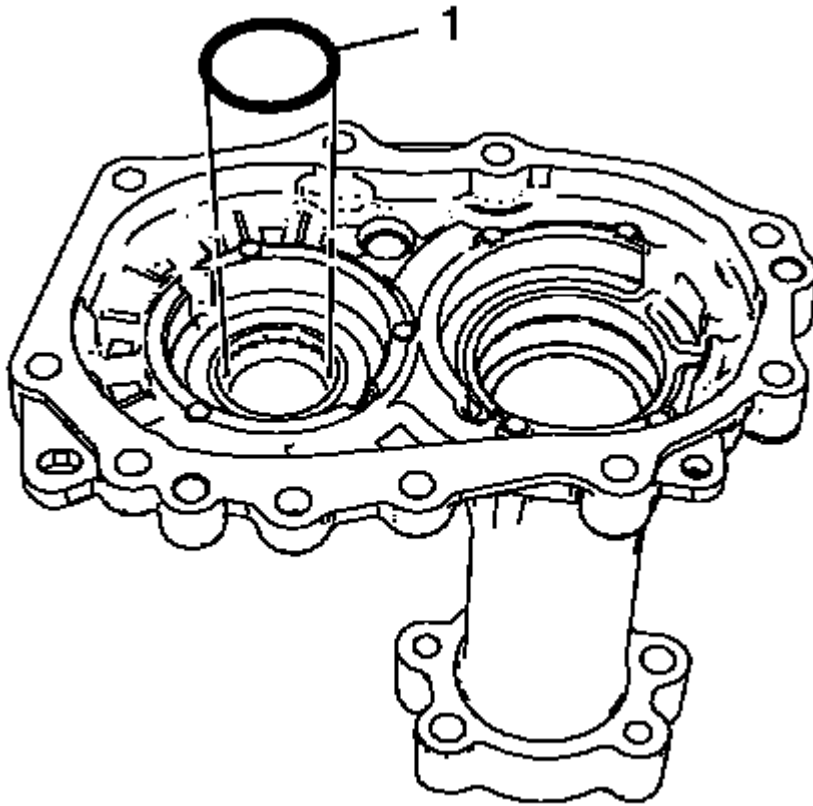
Identifying Idler Gear Shaft Rear Seal
